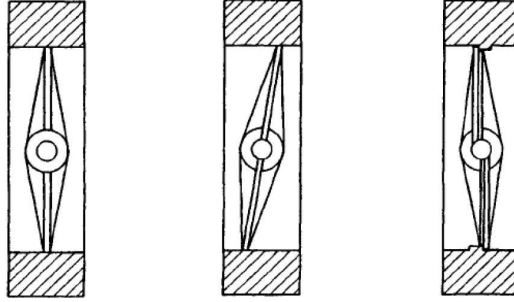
Simplified cross sections of three types of butterfly valves; left: swing-thru disc, center: angle-seated disc, right: step-seated disc [25].
